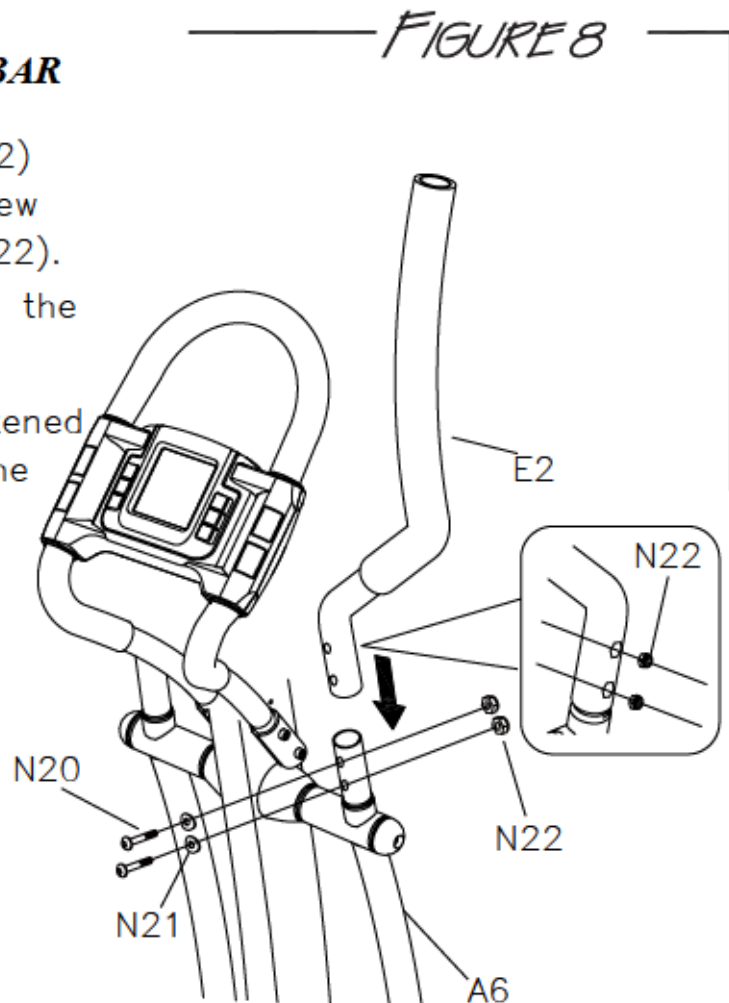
ASSEMBLY FOR HANDLE BAR
